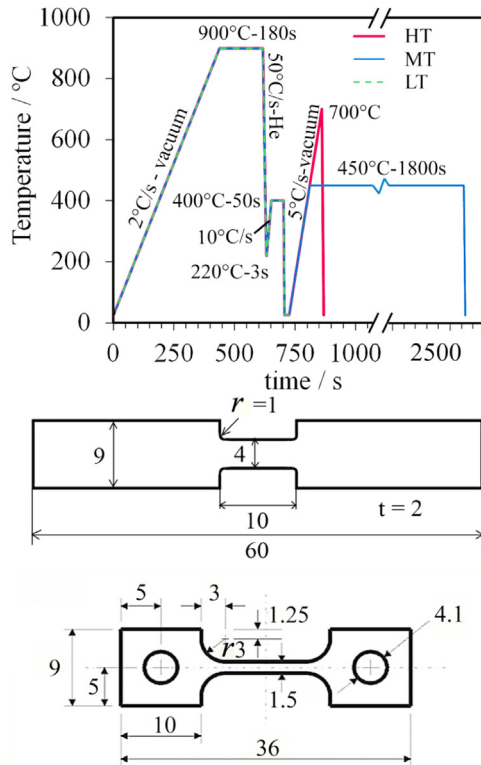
(a) Thermal history of different materials used in this study. (b) Drawing of the specimen dimensions heated at dilatometer and (c) tensile specimen geometry used in the in-situ SXR experiments.
